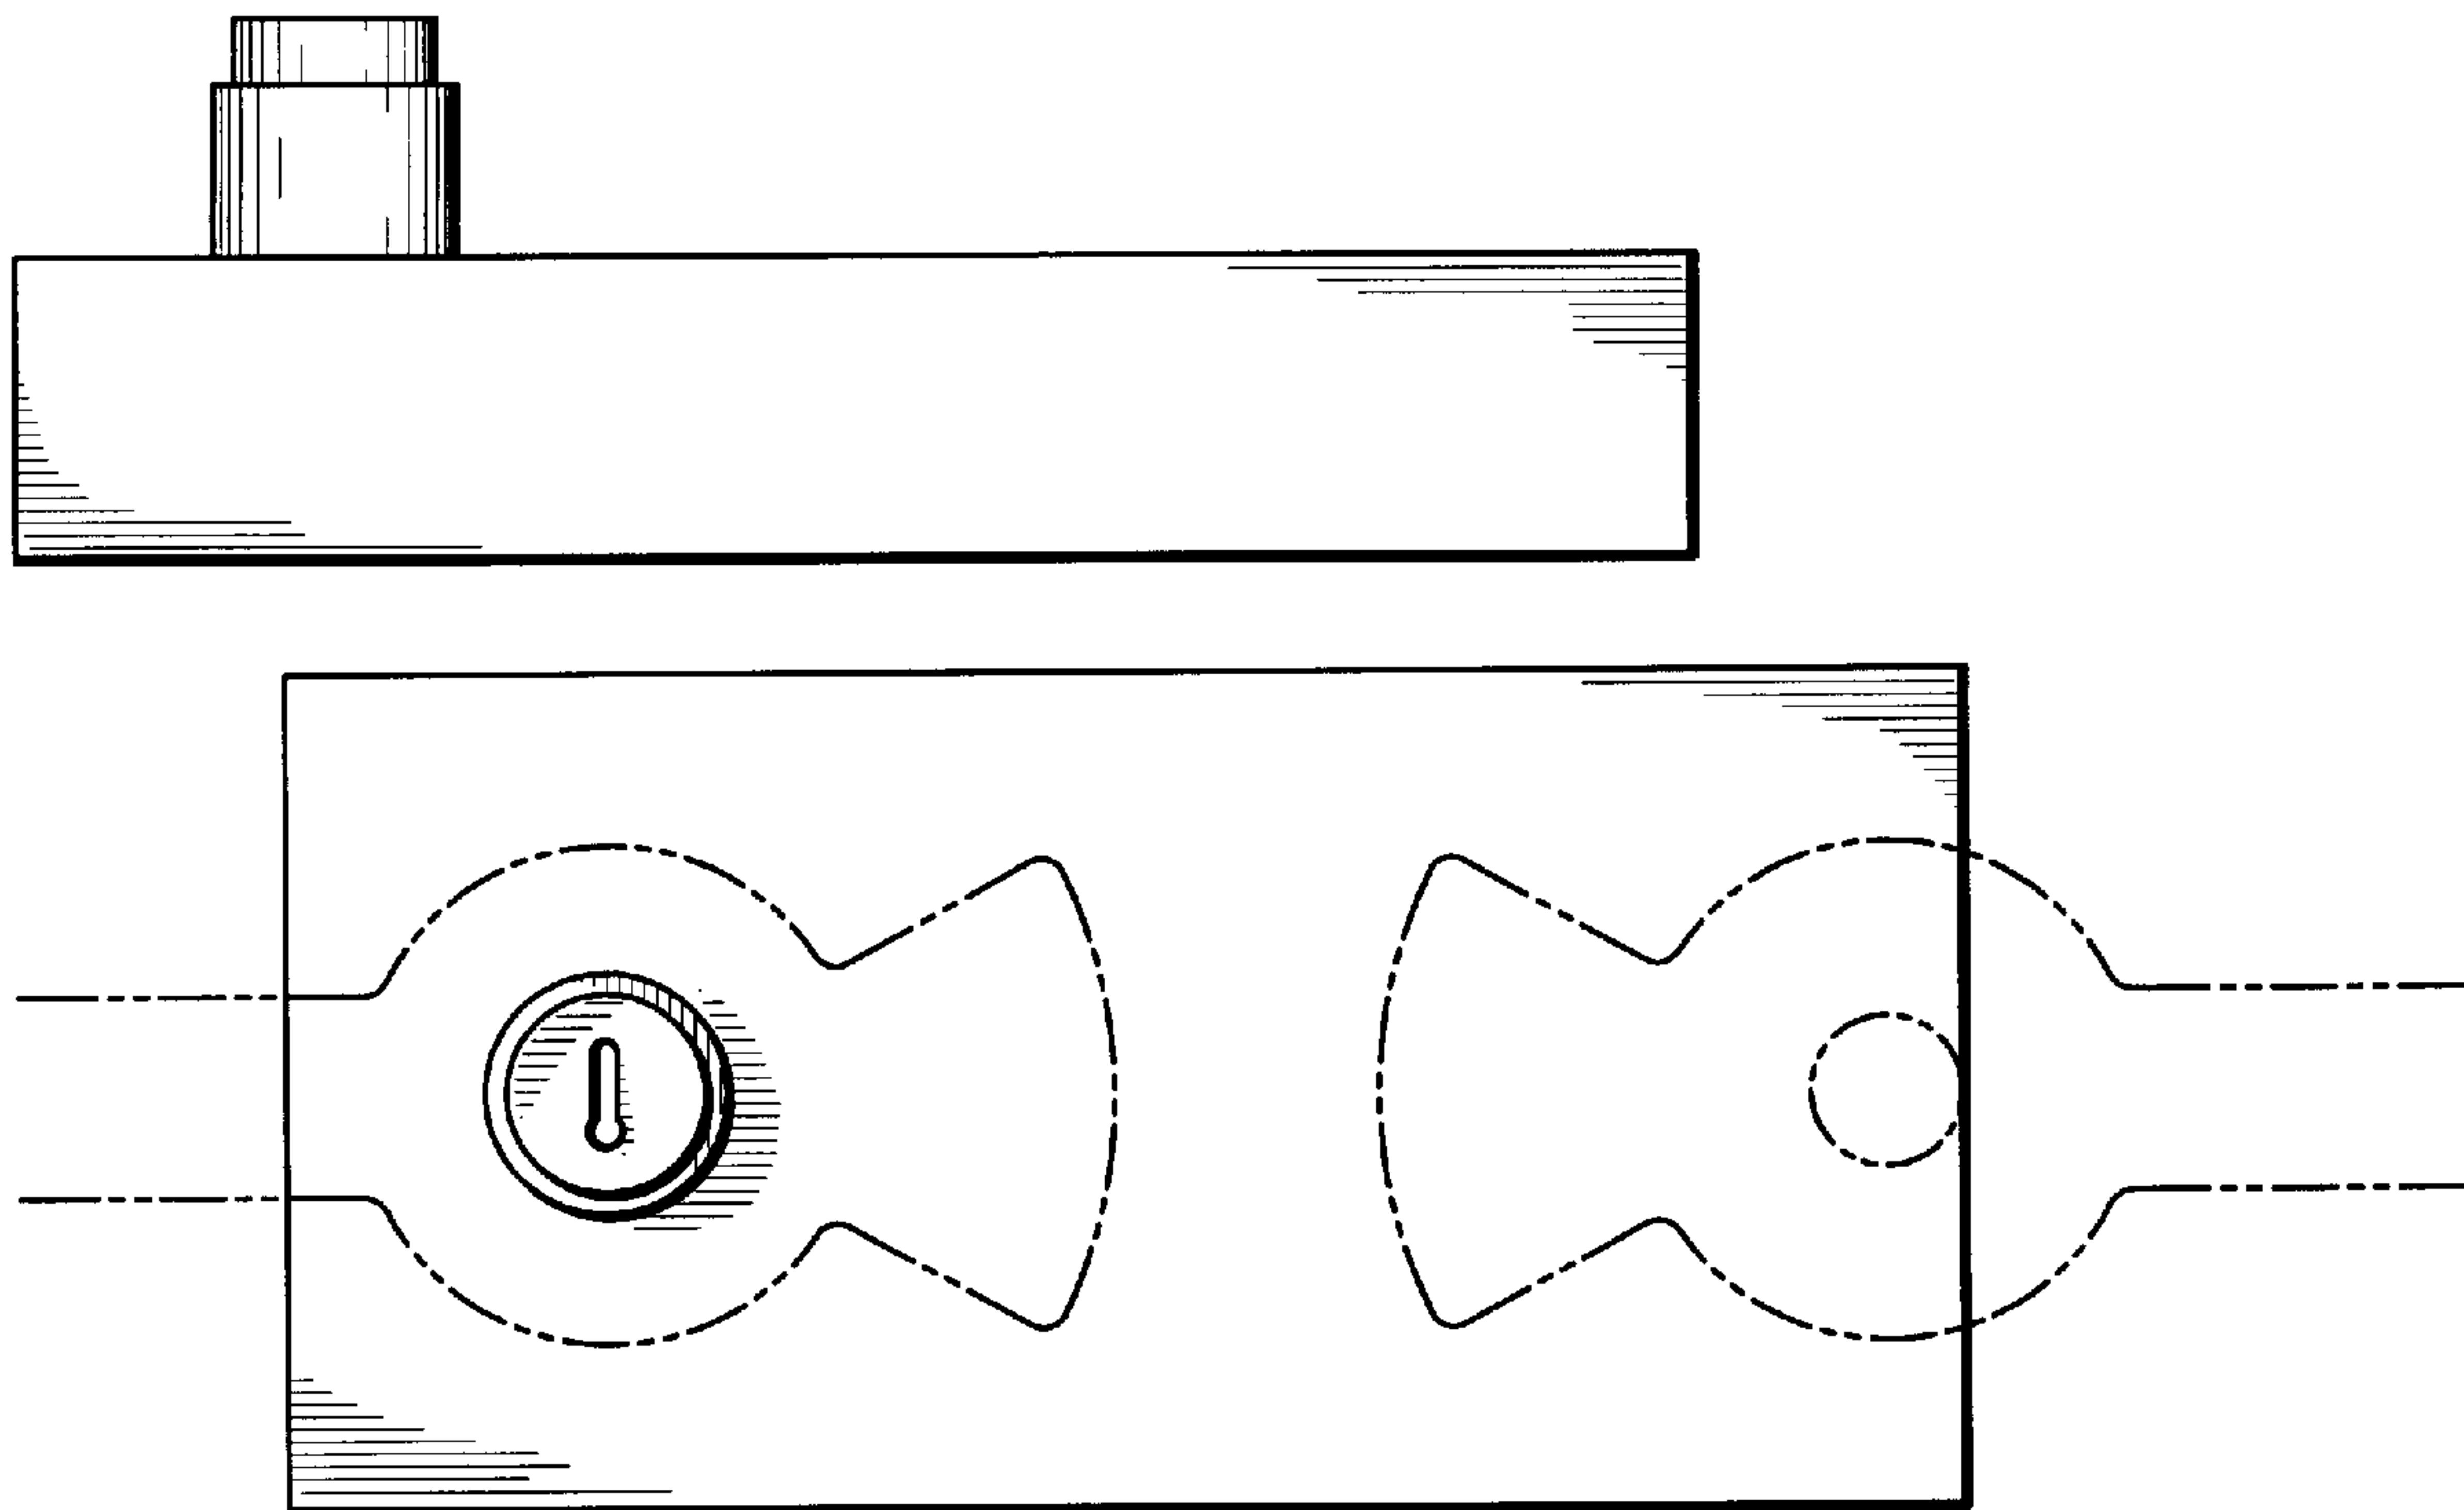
is a right side elevational view of the glad hand lock of FIG. 1;
